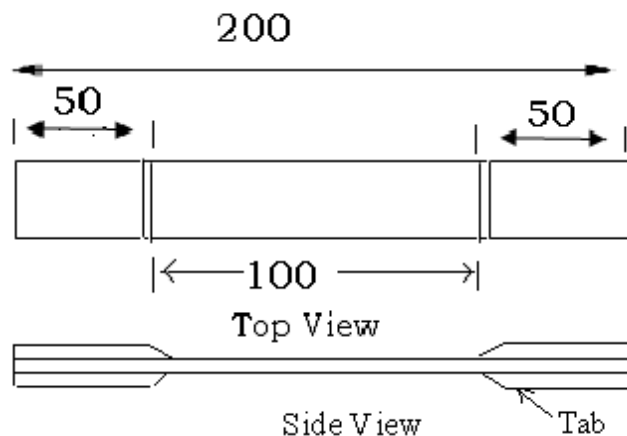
Sketch of lamina specimens with tab (all dimension in mm)
